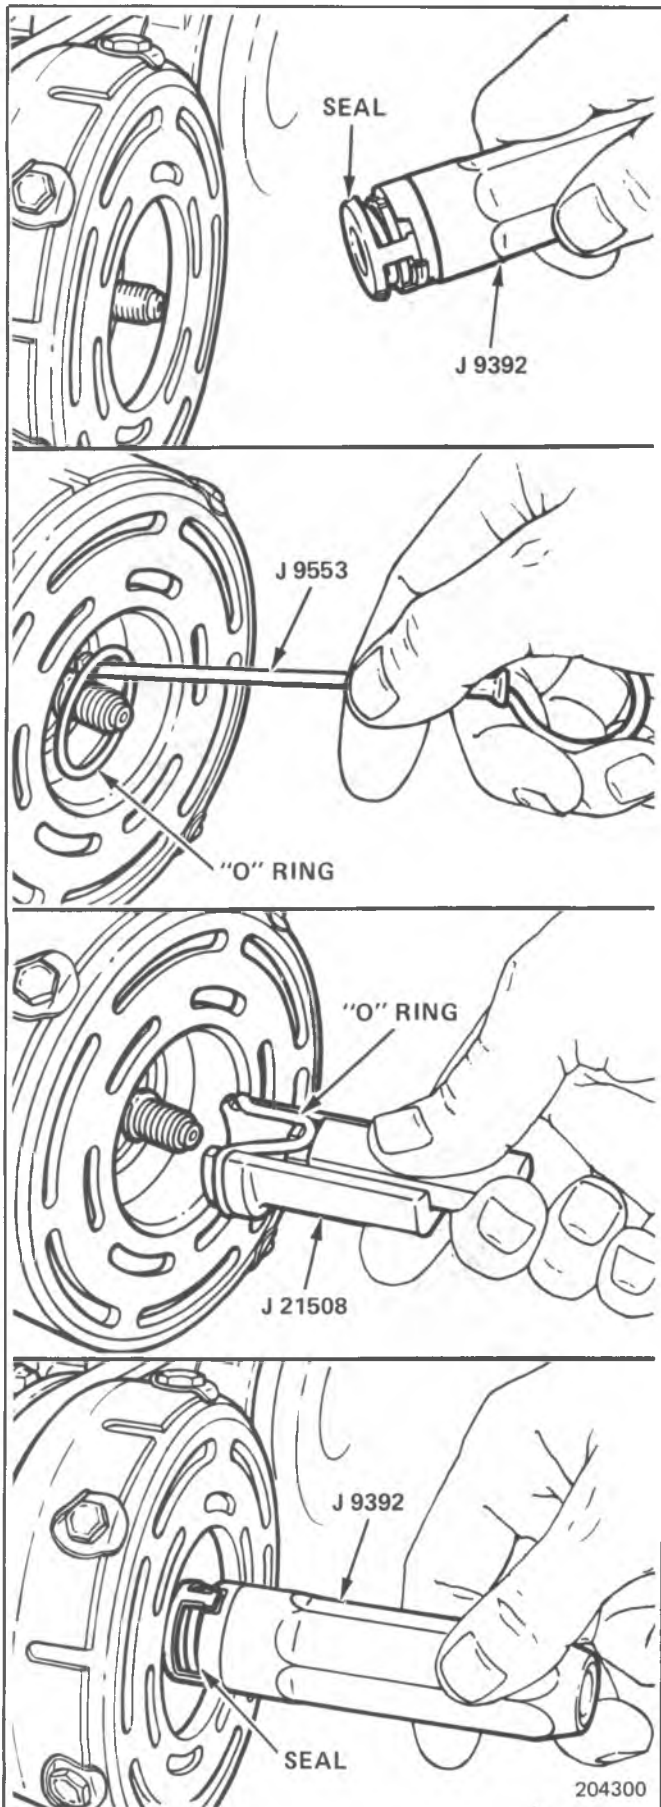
D-89 Removing and Installing R-4 Seal and O-Ring (On-Car)
